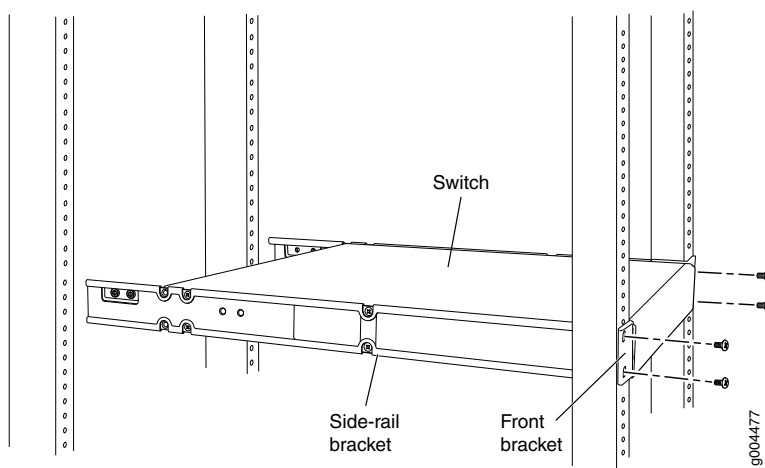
Attaching the Front Bracket to the Side-Rail Bracket
